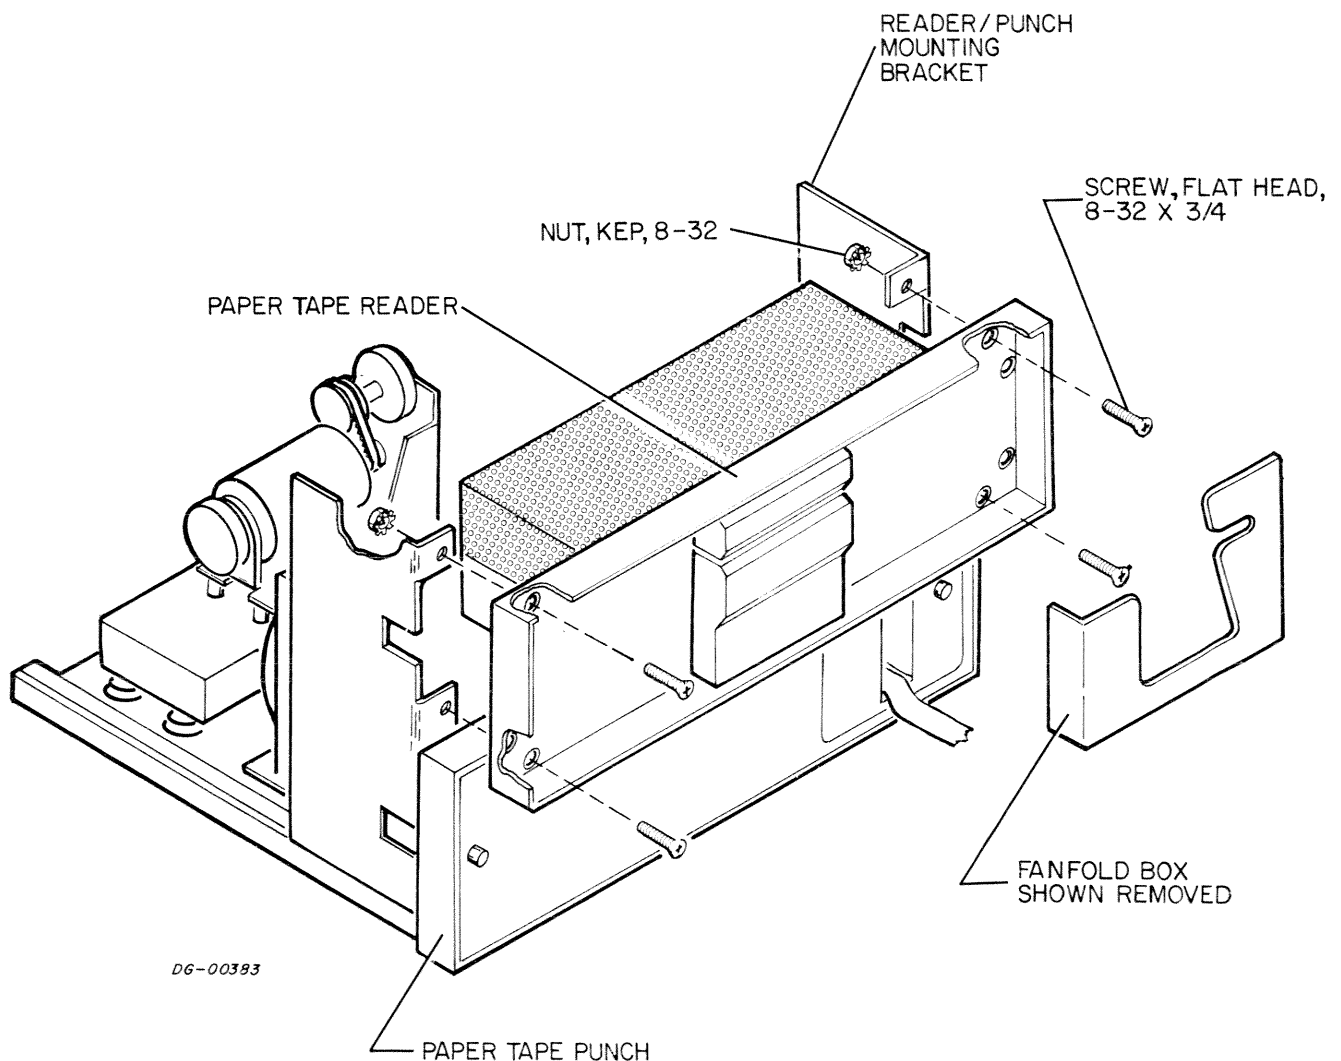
Mounting the Paper Tape Reader on the Paper Tape Punch
